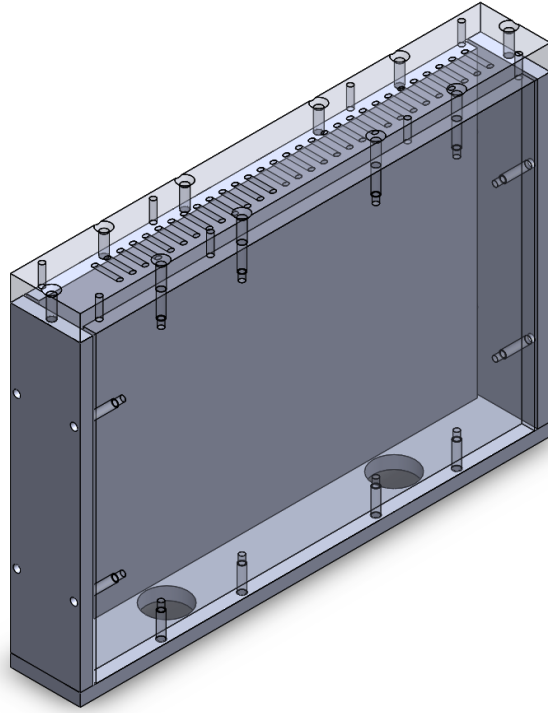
Design of the upstream purge plenum assembly with swirled injection holes
